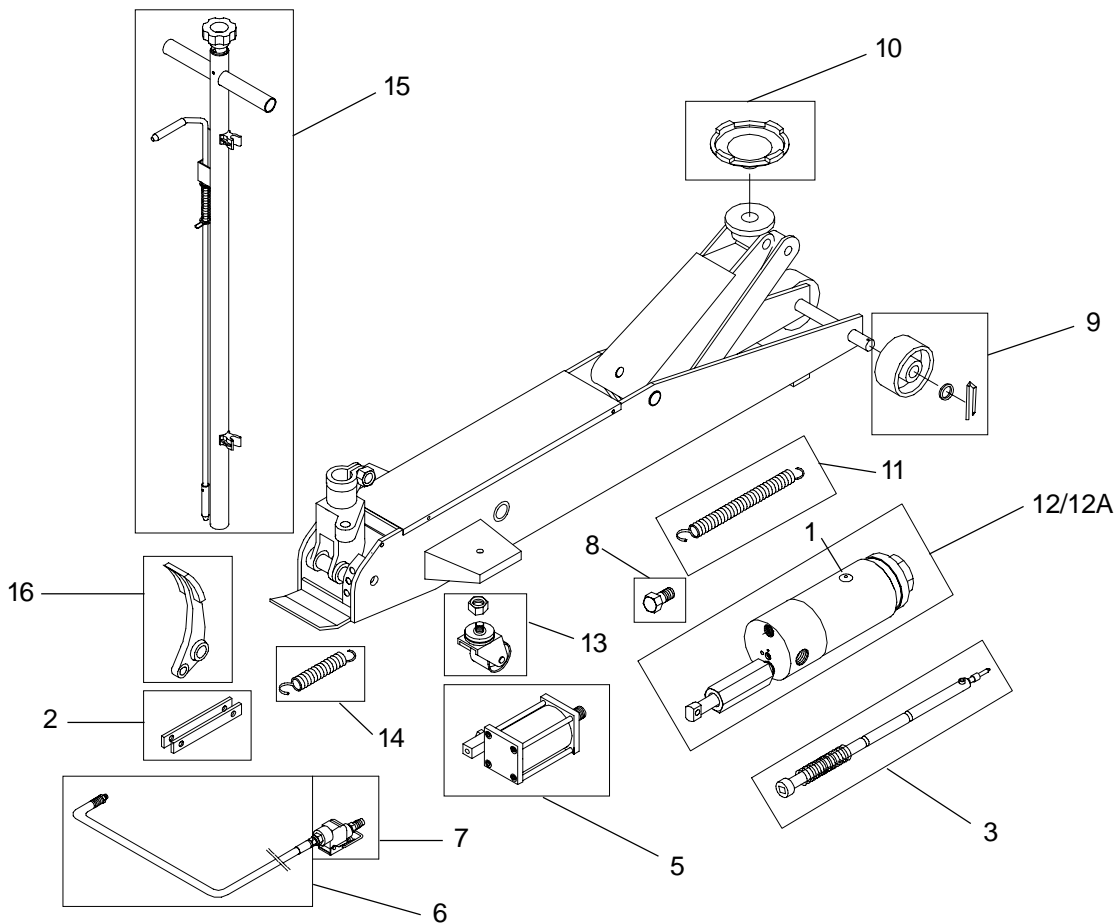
Replacement Parts Illustration for Model 22040 and 22041
